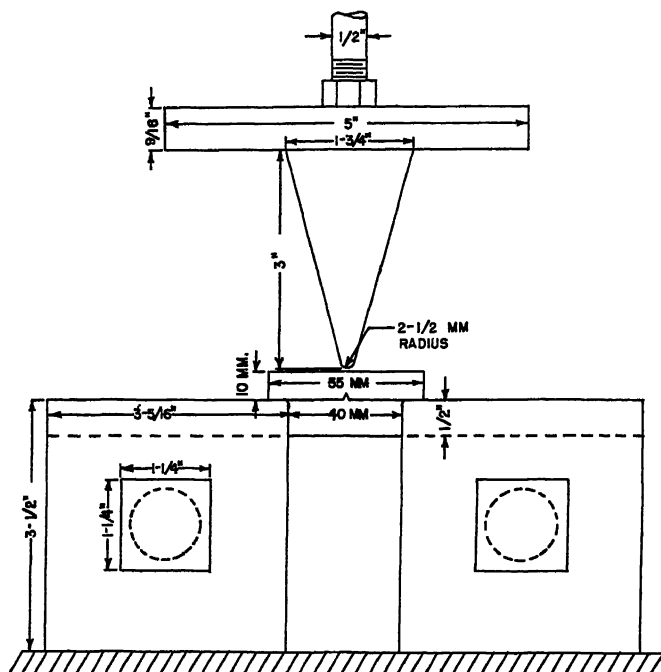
DIAGRAM OF JIG FOR TESTING SLOW-BEND SPECIMENS.
